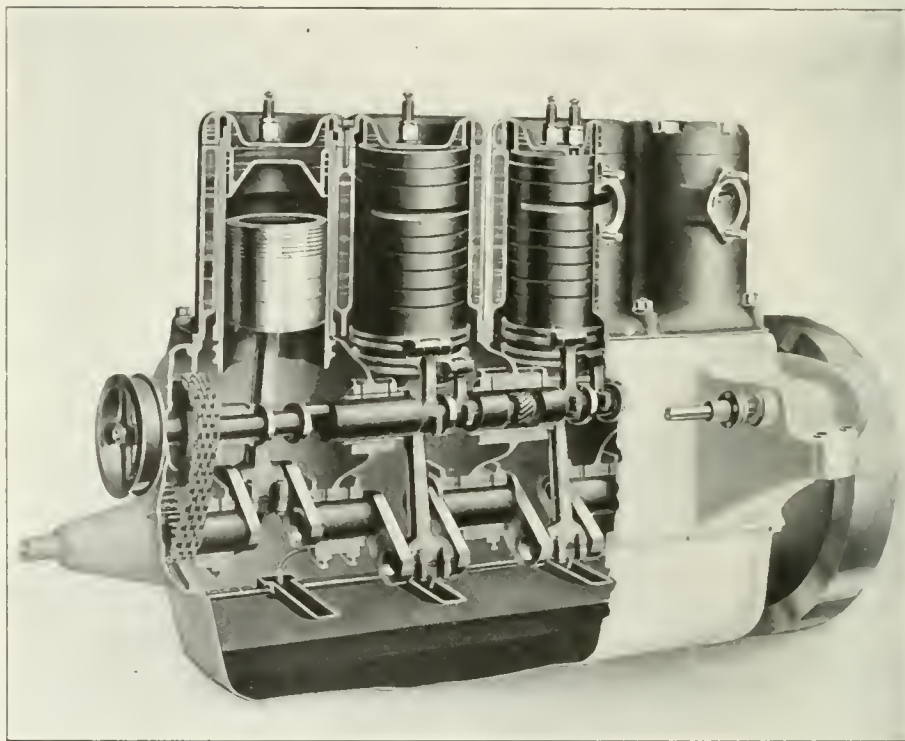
Knight's Slide-valve Motor, showing Sleeve Valves and Valve-actuating Crankshaft, etc.
